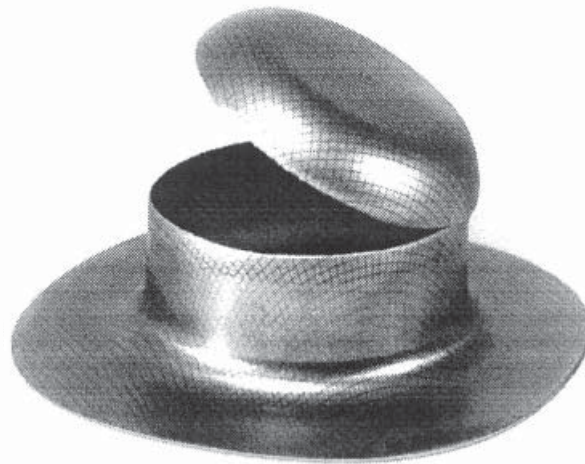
Partly drawn cup made from mild steel. This example gives a very good picture of the fracture placed directly at the beginning of the straight part of the punch. A typical draw fracture occurs very close to the actual line of tool to blank contact.
